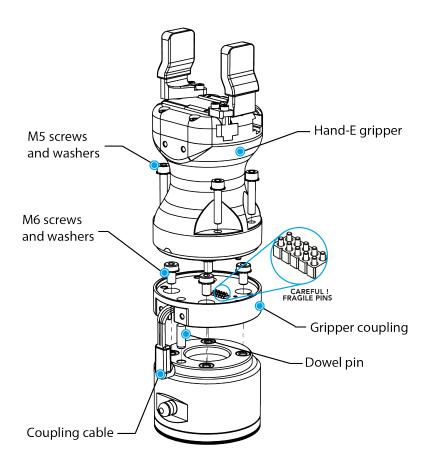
Mechanical installation of the Hand-E Gripper on the robot tool flange.
